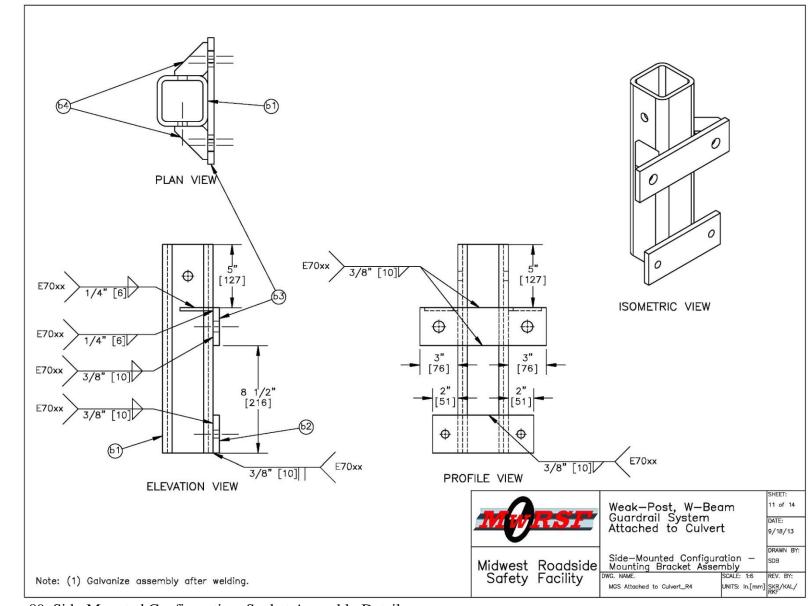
Side-Mounted Configuration, Socket Assembly Details
